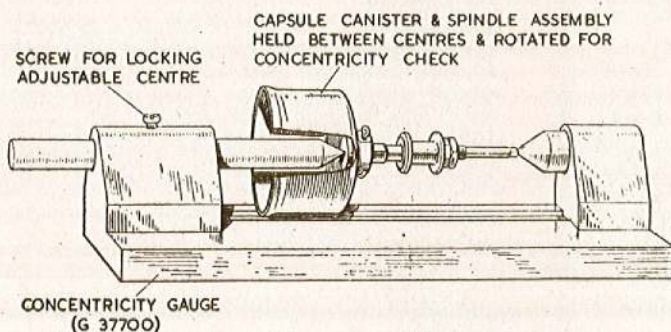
Use of special concentricity gauge G.37700 for checking alignment of capsule canister and spindle assembly
